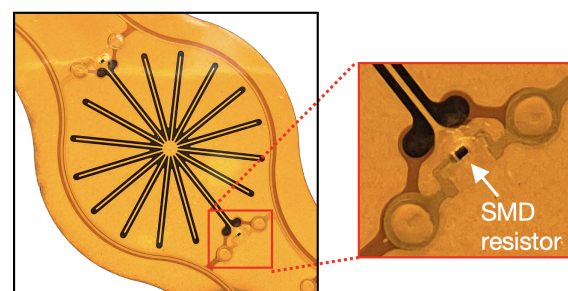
Three polyimide layers incorporating printed layers of wires, contact pads, and sensing elements, integrated with SMD resistors, together comprise the structure of the sensors.
